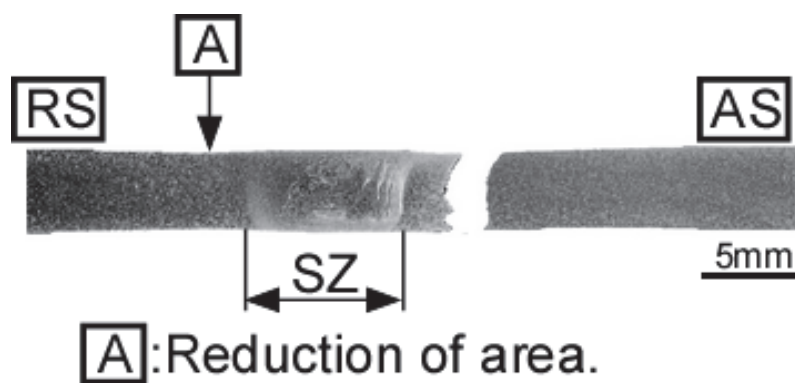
Macrostructure of a fractured tensile testpiece.
